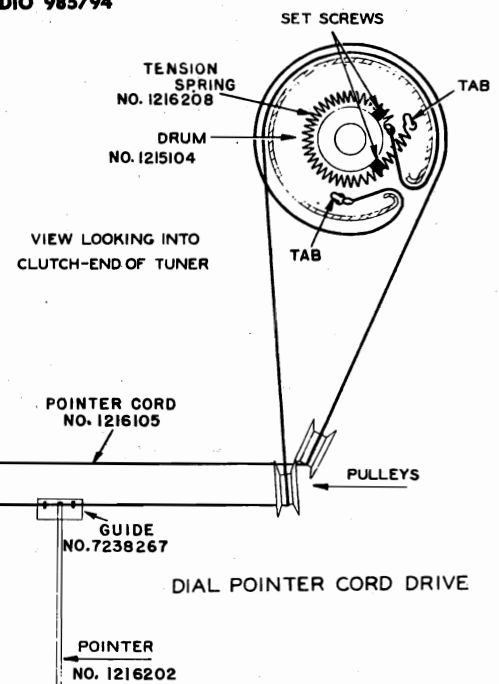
CORD DRIVE ASSEMBLIES—RADIO 985794
